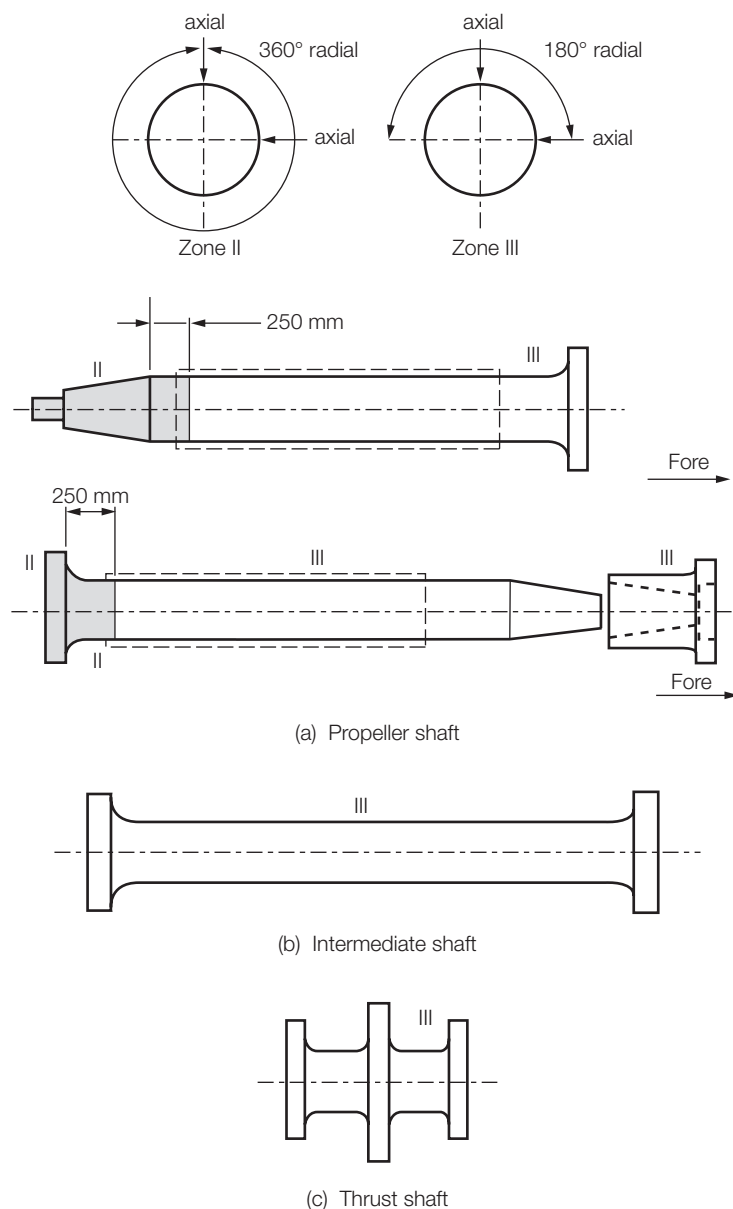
Zones for magnetic particle/dye penetrant testing on machinery components
